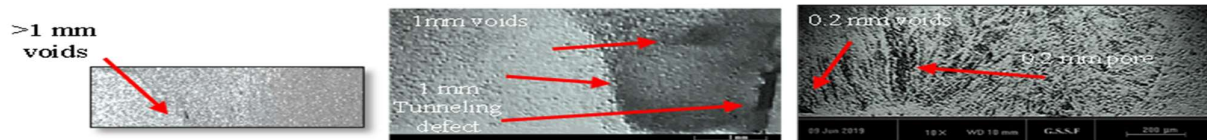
Macro/Micrographs of the surface of friction stir welding sample for cylindrical pin profile (run # 10).
